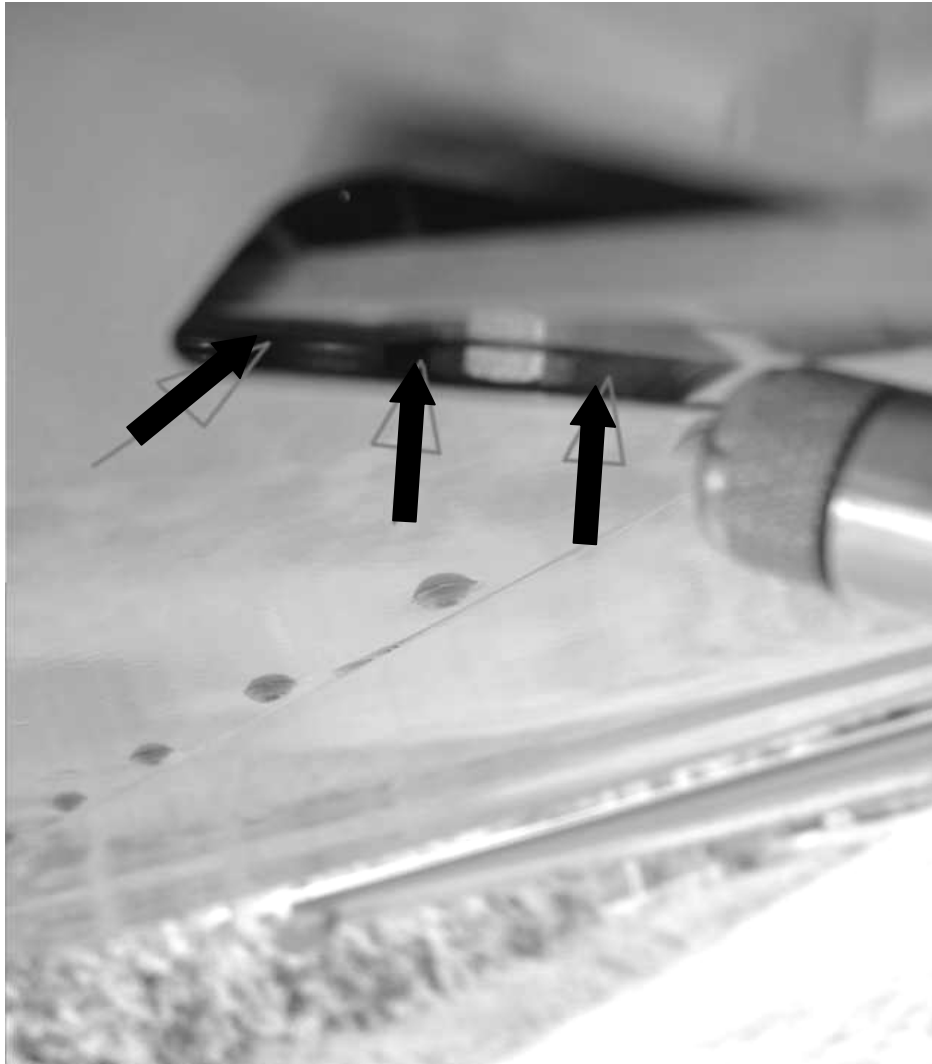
The three arrows here point out the section of the lift strut attachment plate and its fixings that are to be found inside the wing. The torch should be used to aid inspection of these internal parts.
